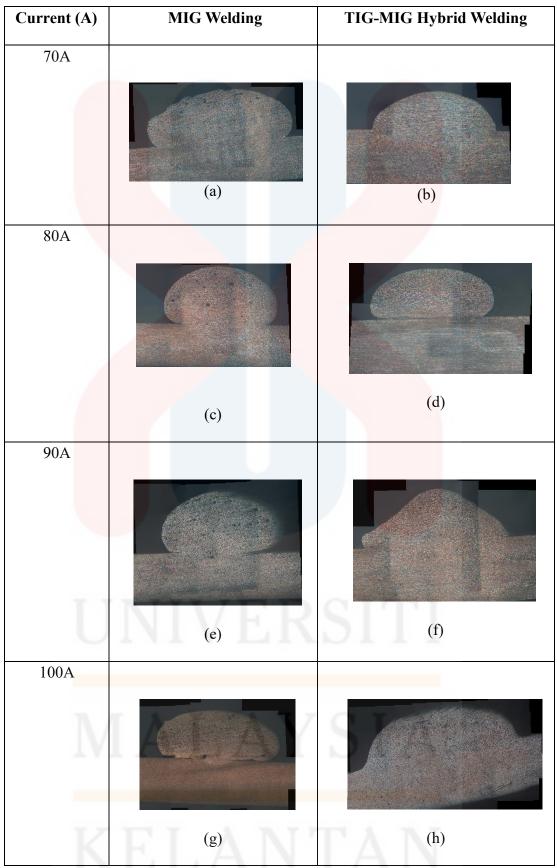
Cross-section of Porosity Formation in Welded Aluminium 5083 Using MIG Welding and TIG-MIG Hybrid Welding
